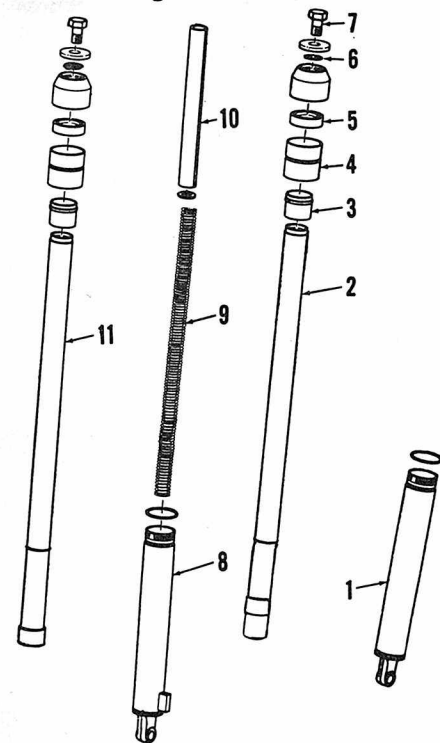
Exploded view of front suspension units used on the JT-1.
